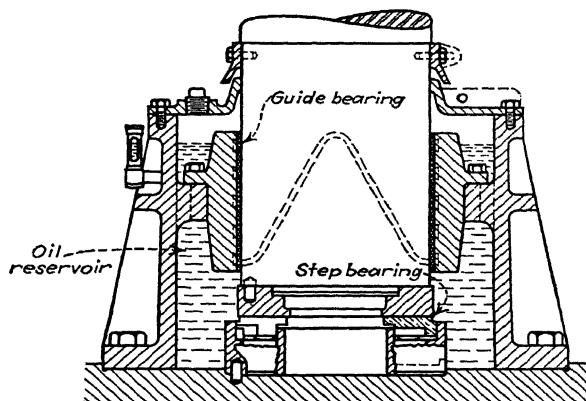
Bath-oiled radial-and-thrust bearing for heavy, slow-speed machinery.
